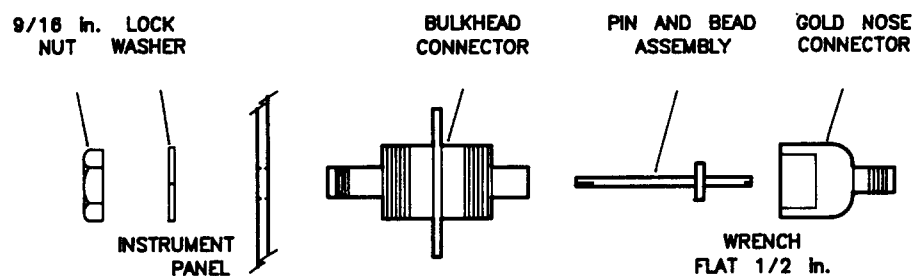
Exploded Diagram of 3.5 mm Connector
